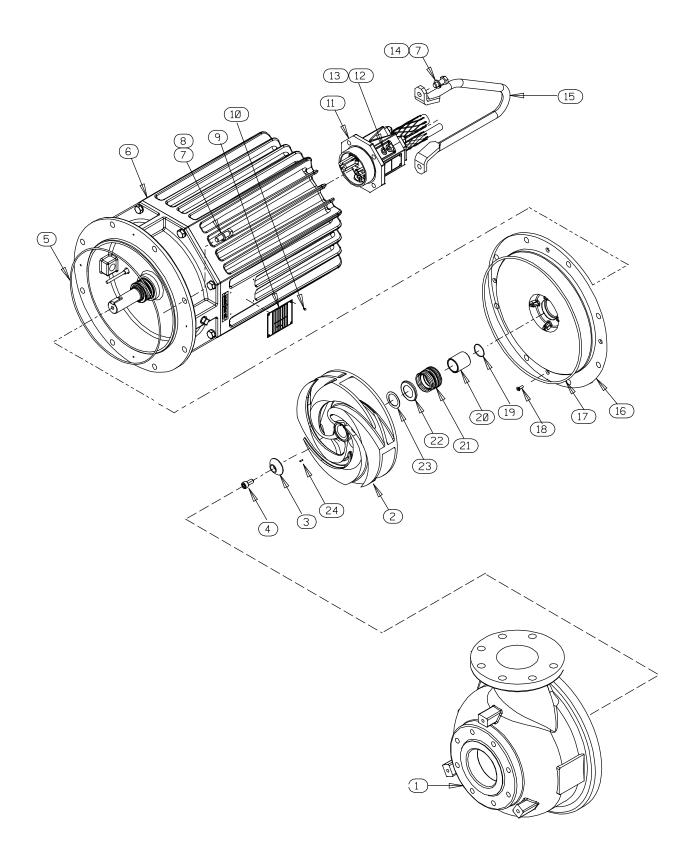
SFV4E–X & SFEV4E–X Pump Model Assembly
